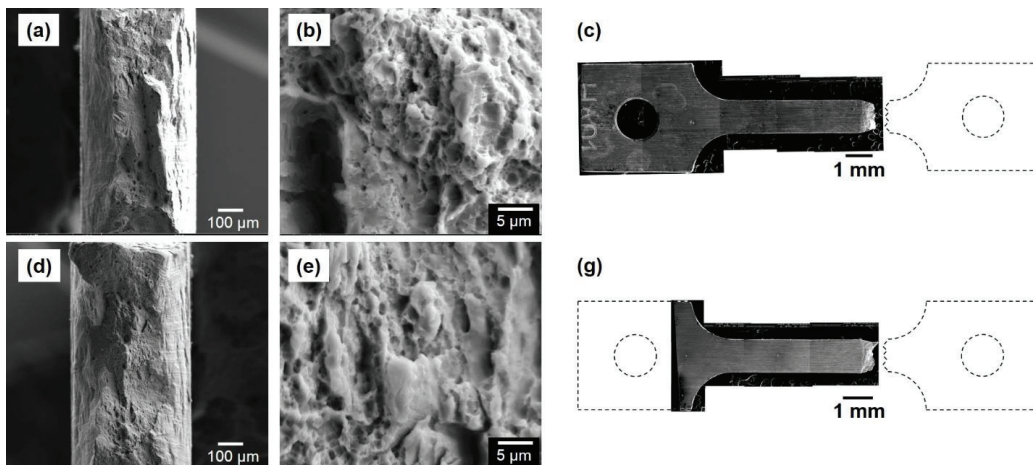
The fracture surface and the overview of the broken tensile specimen of F82H EB-weld joint irradiated at 573 K up to (a-c) 1.2 dpa and (d-f) 9.6 dpa.
